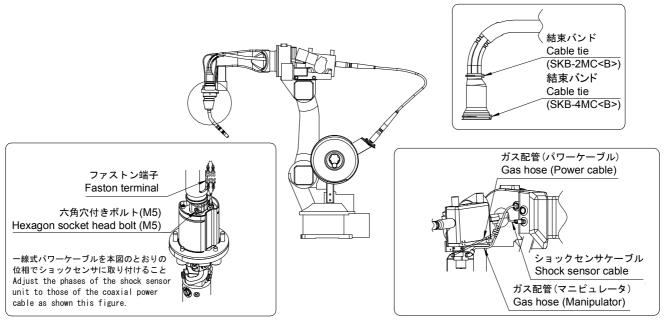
Connection of the coaxial power cable (B4 type manipulator)
